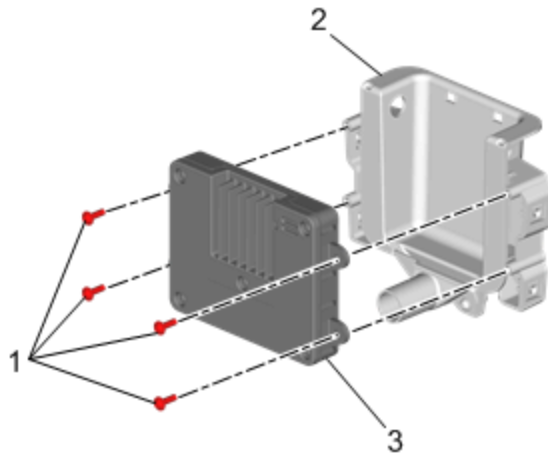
Front Floor Console Accessory Bracket, Wireless Charging System Module And Bracket Bolts
